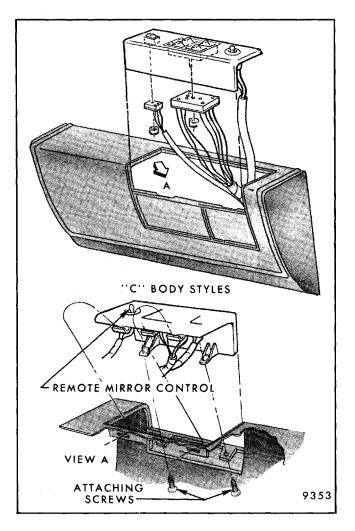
Door Armrest Switch Cover Plate and Remote Mirror Cable Attachment - C Styles
